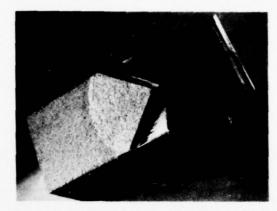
Fracture Surface of 7075-T73 Toughness Specimen 0124.
